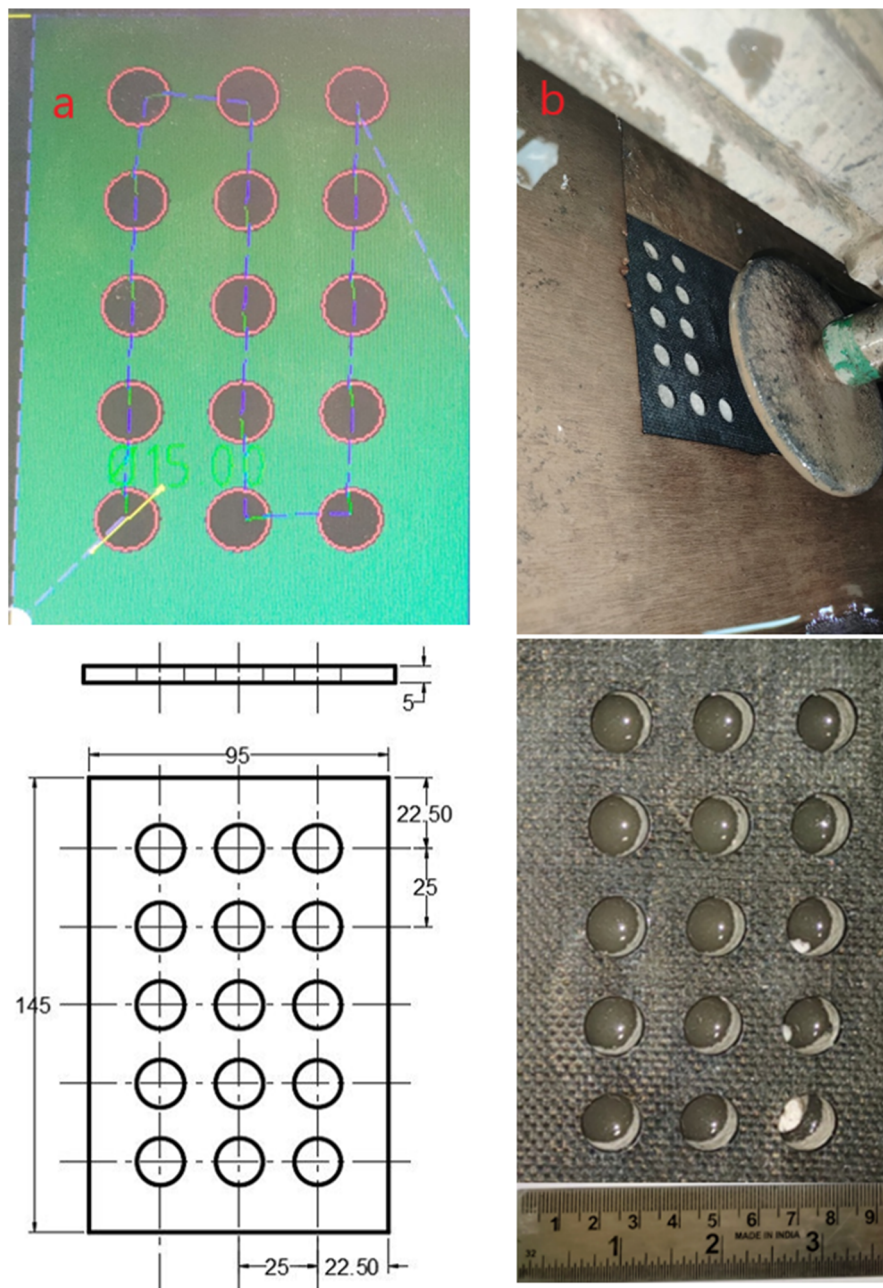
Machining (a) CAD design path, (b) machined holes in the composites.
